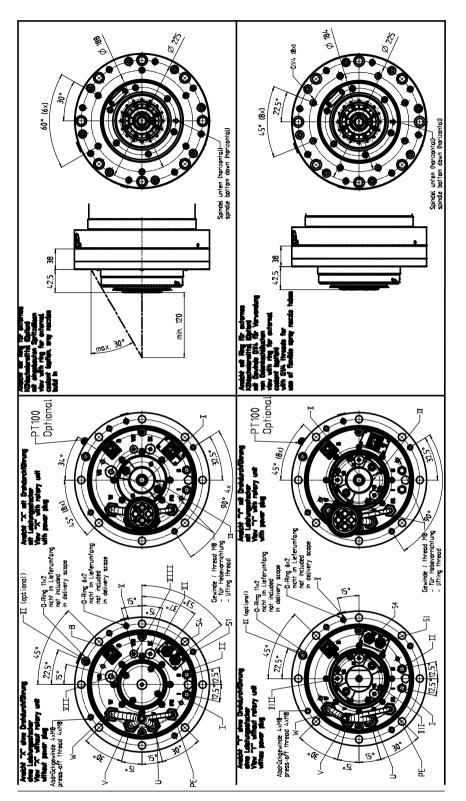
Spindle 2SP120 -1, spindle nose and spindle connections
